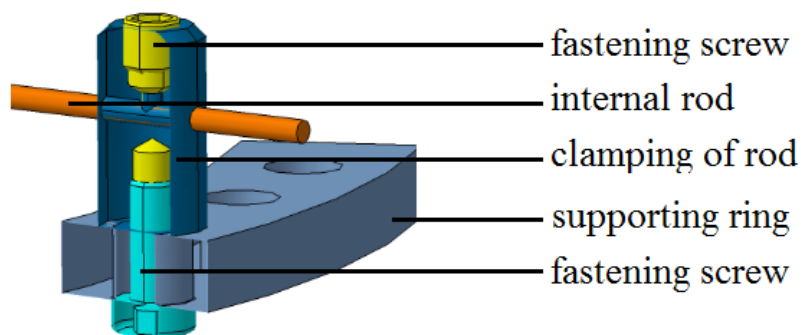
Clamping of internal Kirschner rod – concept 1
